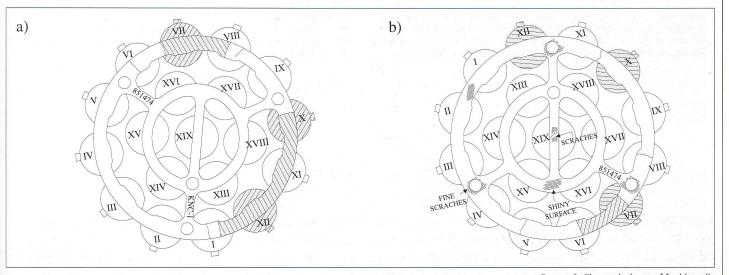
The end plates of fuel bundle a) End plate No. I (Having KNC-I engraved on it) b) End plate No. II
